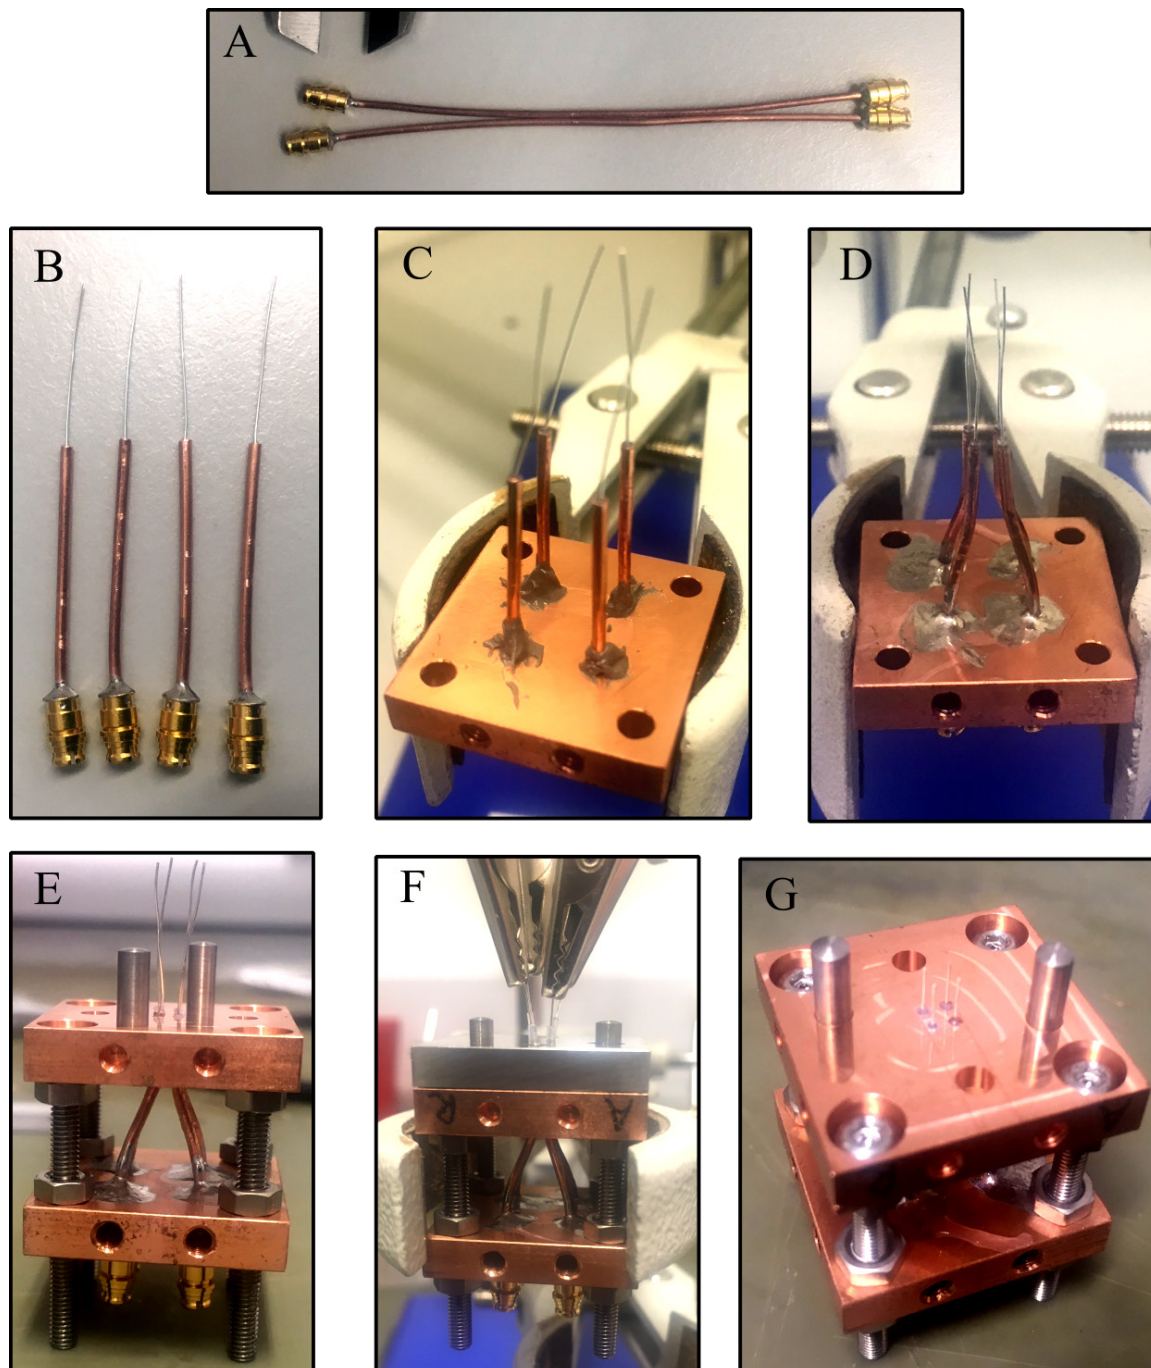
Control plug assembly steps: Optical images showing the control plug assembly process. The steps are described in the main text.
